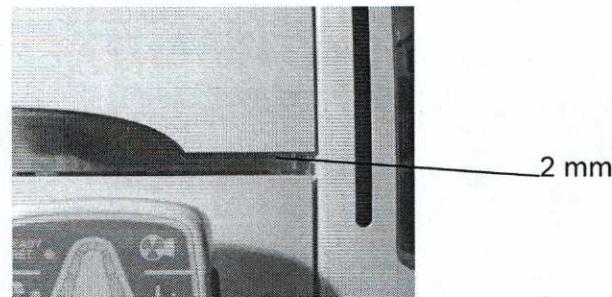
Carriage side covers (left and right) should leave 2 mm gap after closing the screws
